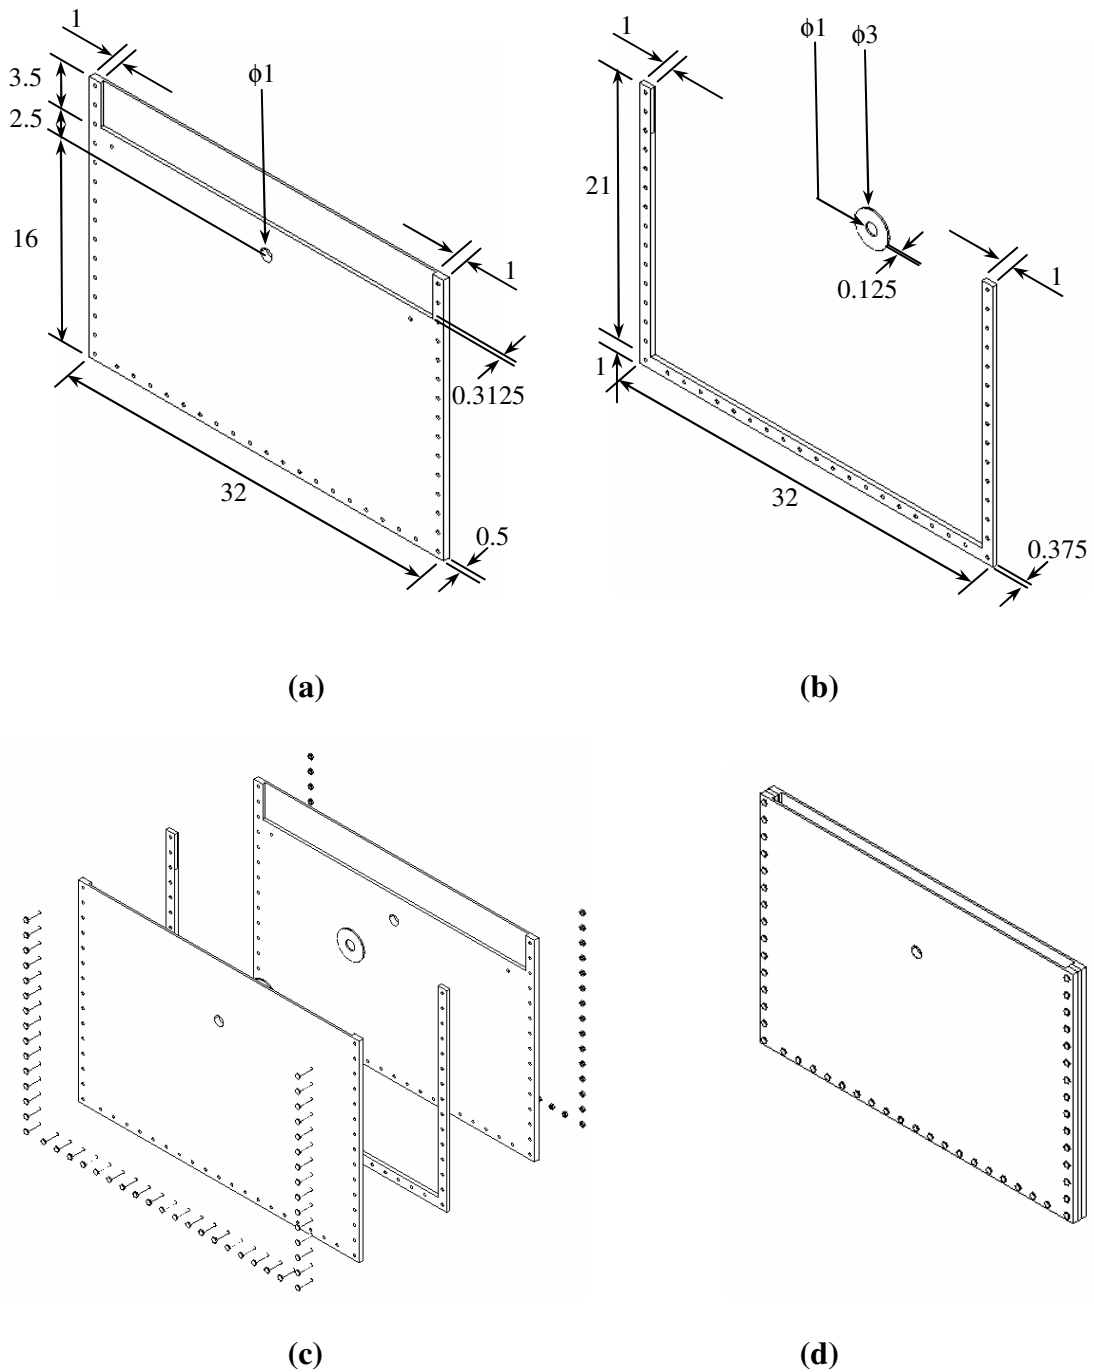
The dimensions of Hele-Shaw cell B (in inches): (a) the front/back wall, (b) the spacers, (c) the assembly components and, (d) the assembled cell.
